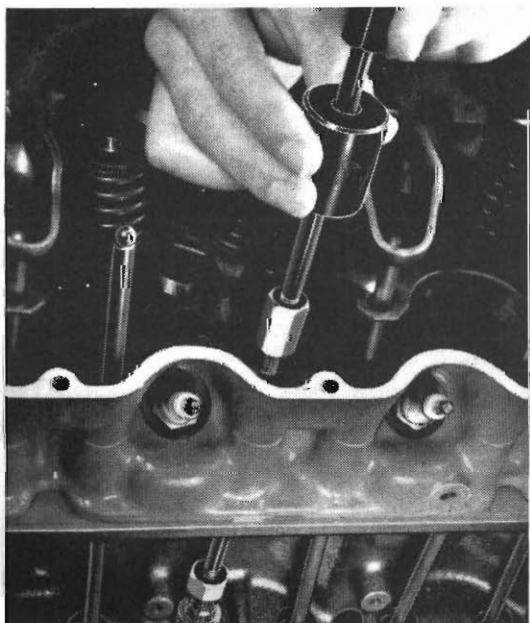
Removing hydraulic tappets using Tool No. E9C40H
